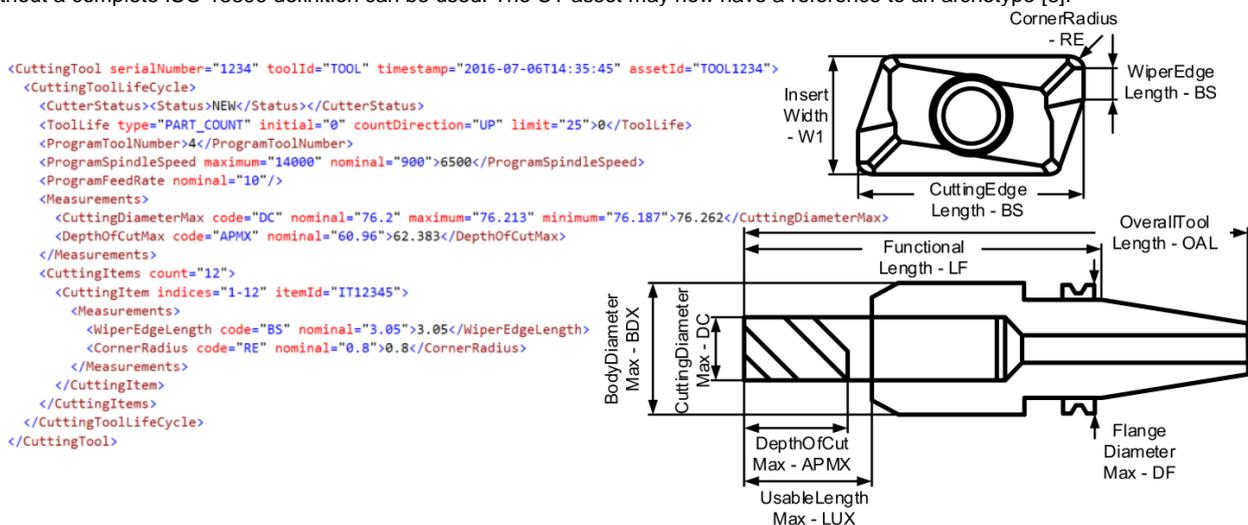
MTConnect cutting tool including ISO 13399 measurement codes [8]
